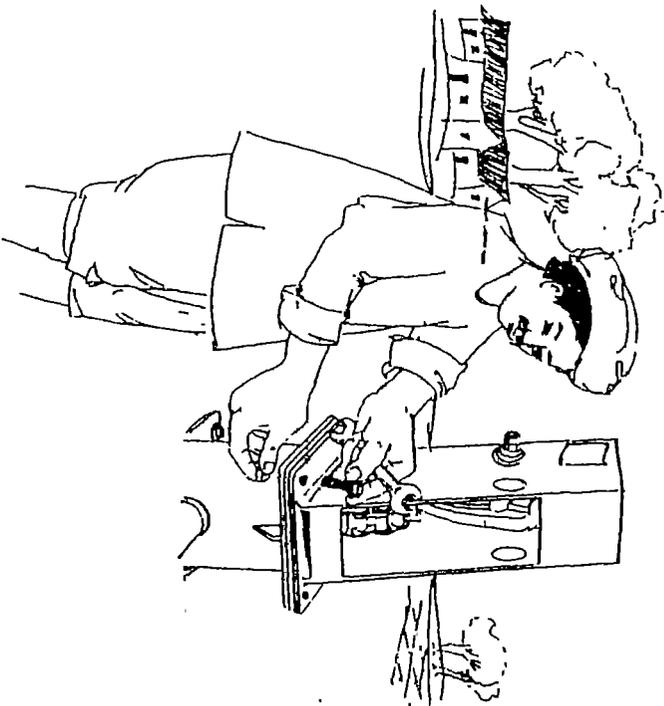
TIGHTEN HEAD ASSEMBLY
